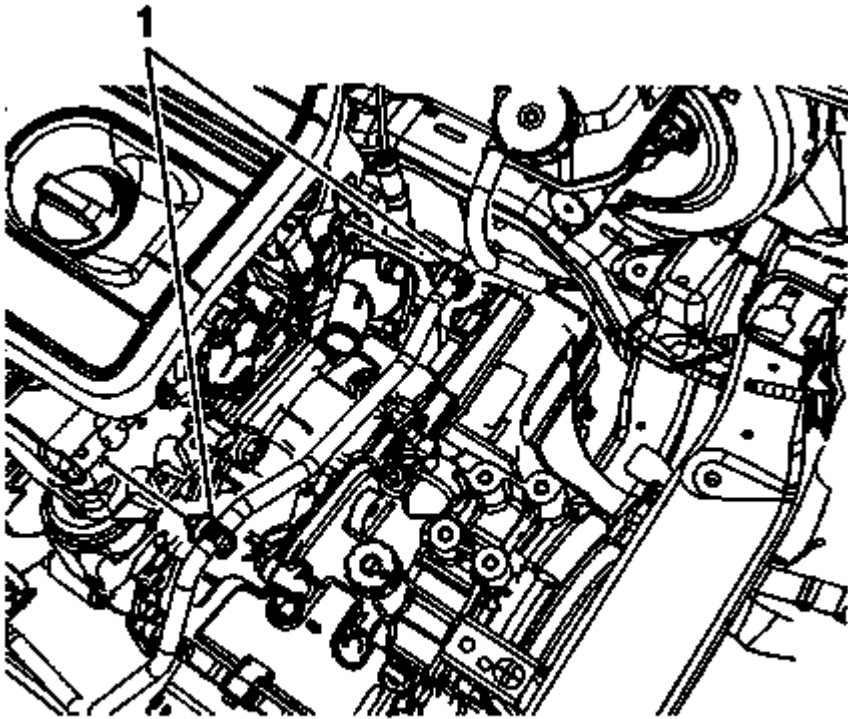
Power Brake Booster Vacuum Pipe Clips
